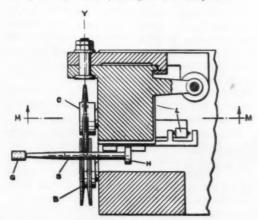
FIG. I—Spindle between contact roll bearings spins up to 500,000 rpm without special lubricant.
